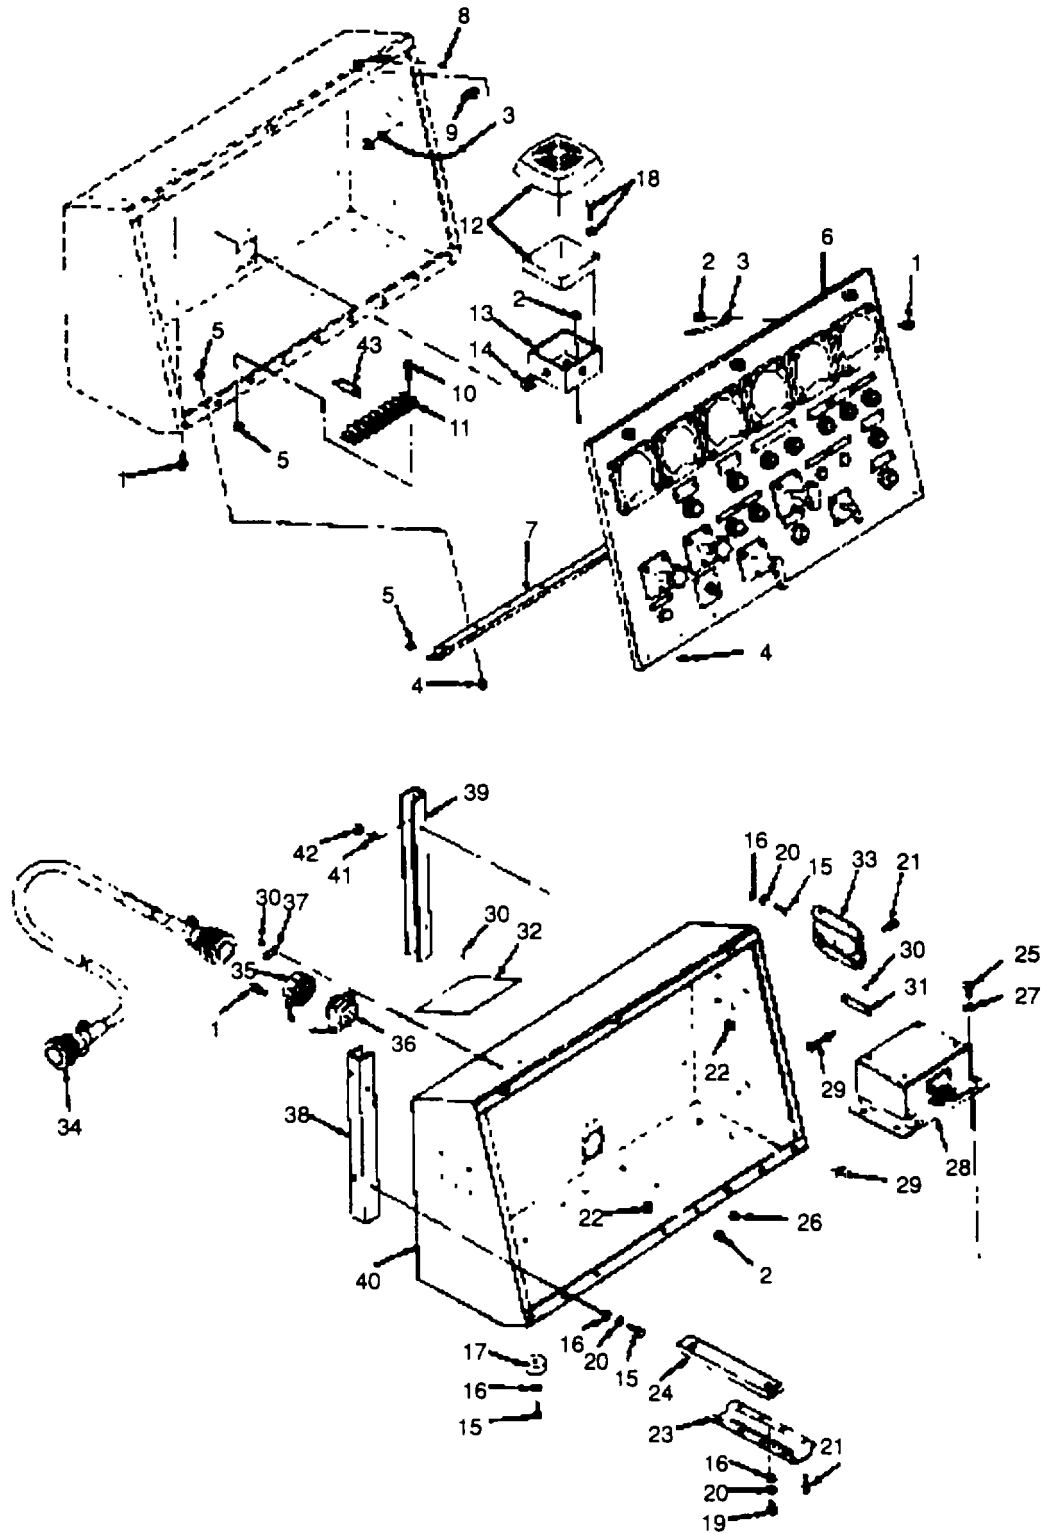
Remote Control Module Assembly (Sheet 1 of 2)
